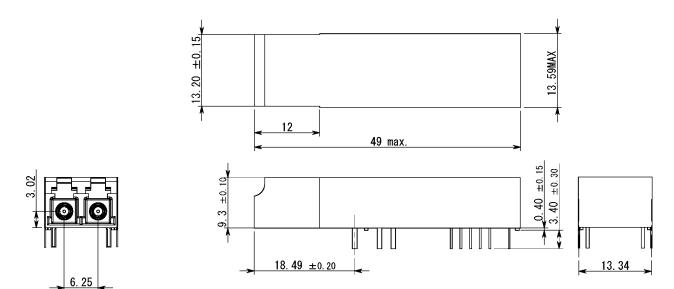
Outline Dimensions (SCM6212-GL-Z#)
